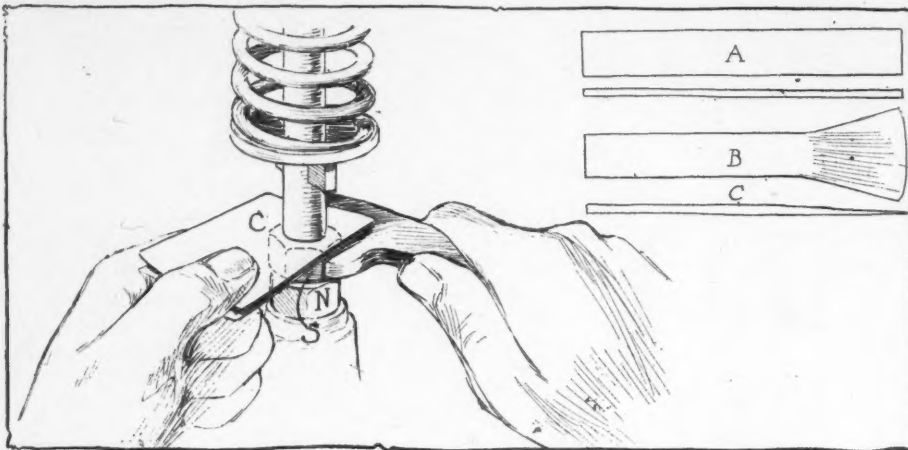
ADJUSTING VALVE TAPPETS AND A TOOL FOR LOCATING NOISY ONES
